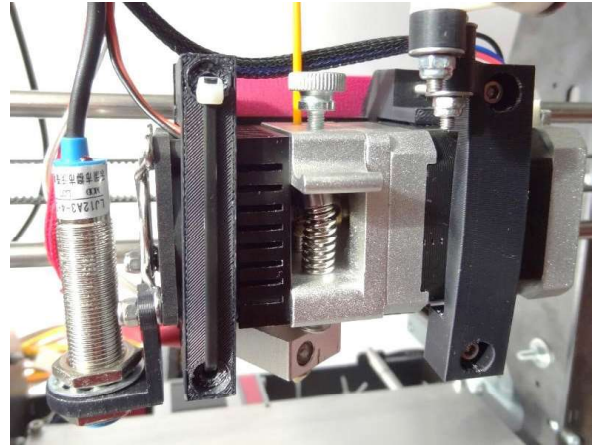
The complete MK8 extruder mounted with the use of printed parts [own elaboration]
